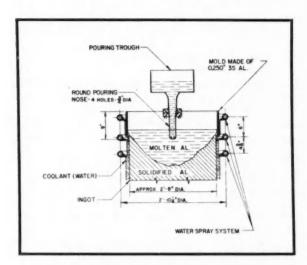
Sketch of direct-chill casting equipment for production of 32 in. diam 145 aluminum alloy ingot.
